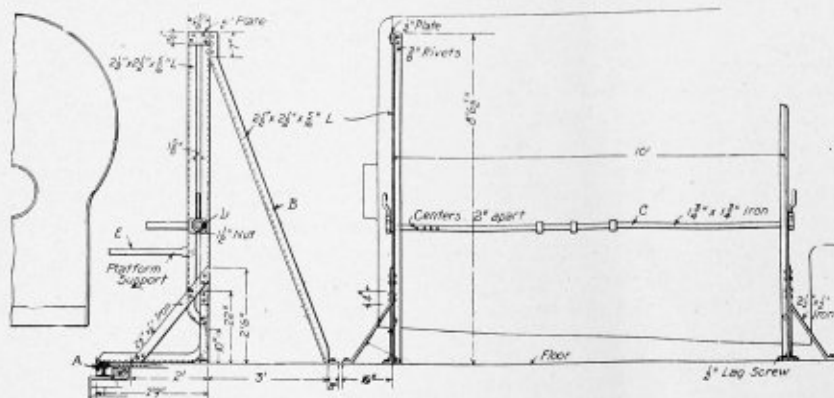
RACK USED IN DRILLING STAY-BOLTS, LAKE SHORE & MICHIGAN SOUTHERN RY., COLLINWOOD, O.
